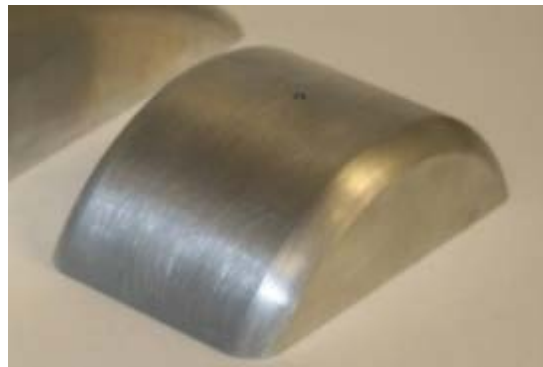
Aluminum “rigid” indenter for stringer specimen tests having 76.2 mm radius
